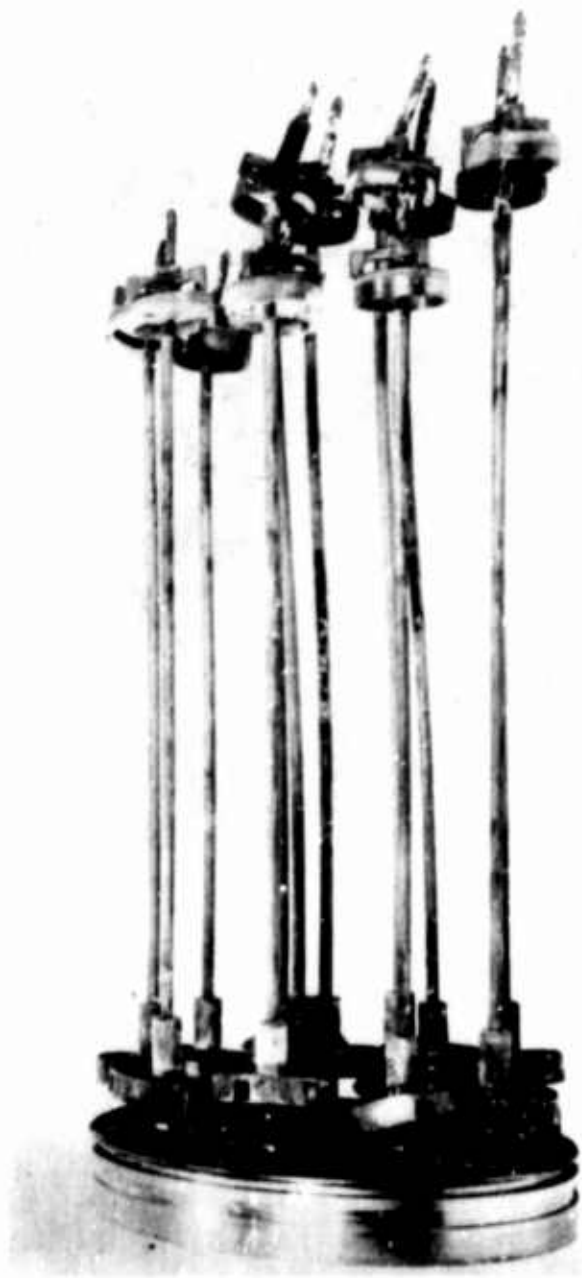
Head End and Suspension Assembly, XM15 Escape Rocket,
